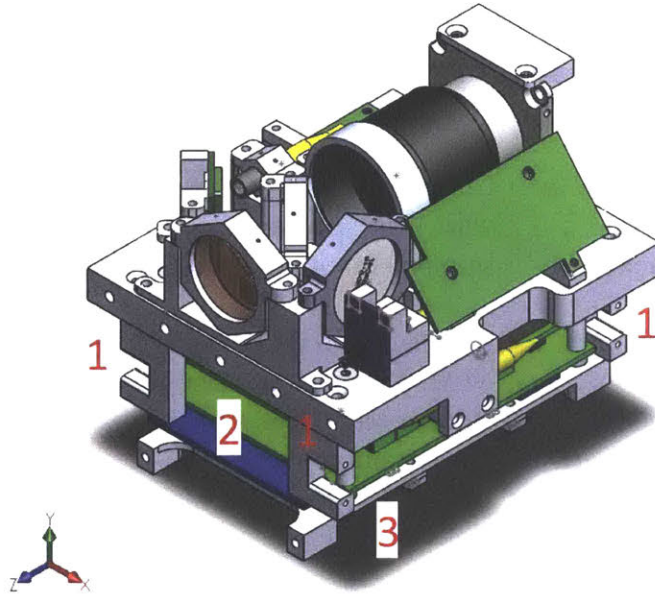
NODE PCBs are mounted to -Y face on standoffs. Standoffs are designed to hold excess fiber and ensure minimum bend radius. A second aluminum tray holds in-line fiber components. Standoffs indicated by 1, PCBs indicated by 2. In-line fiber component tray indicated by 3.
